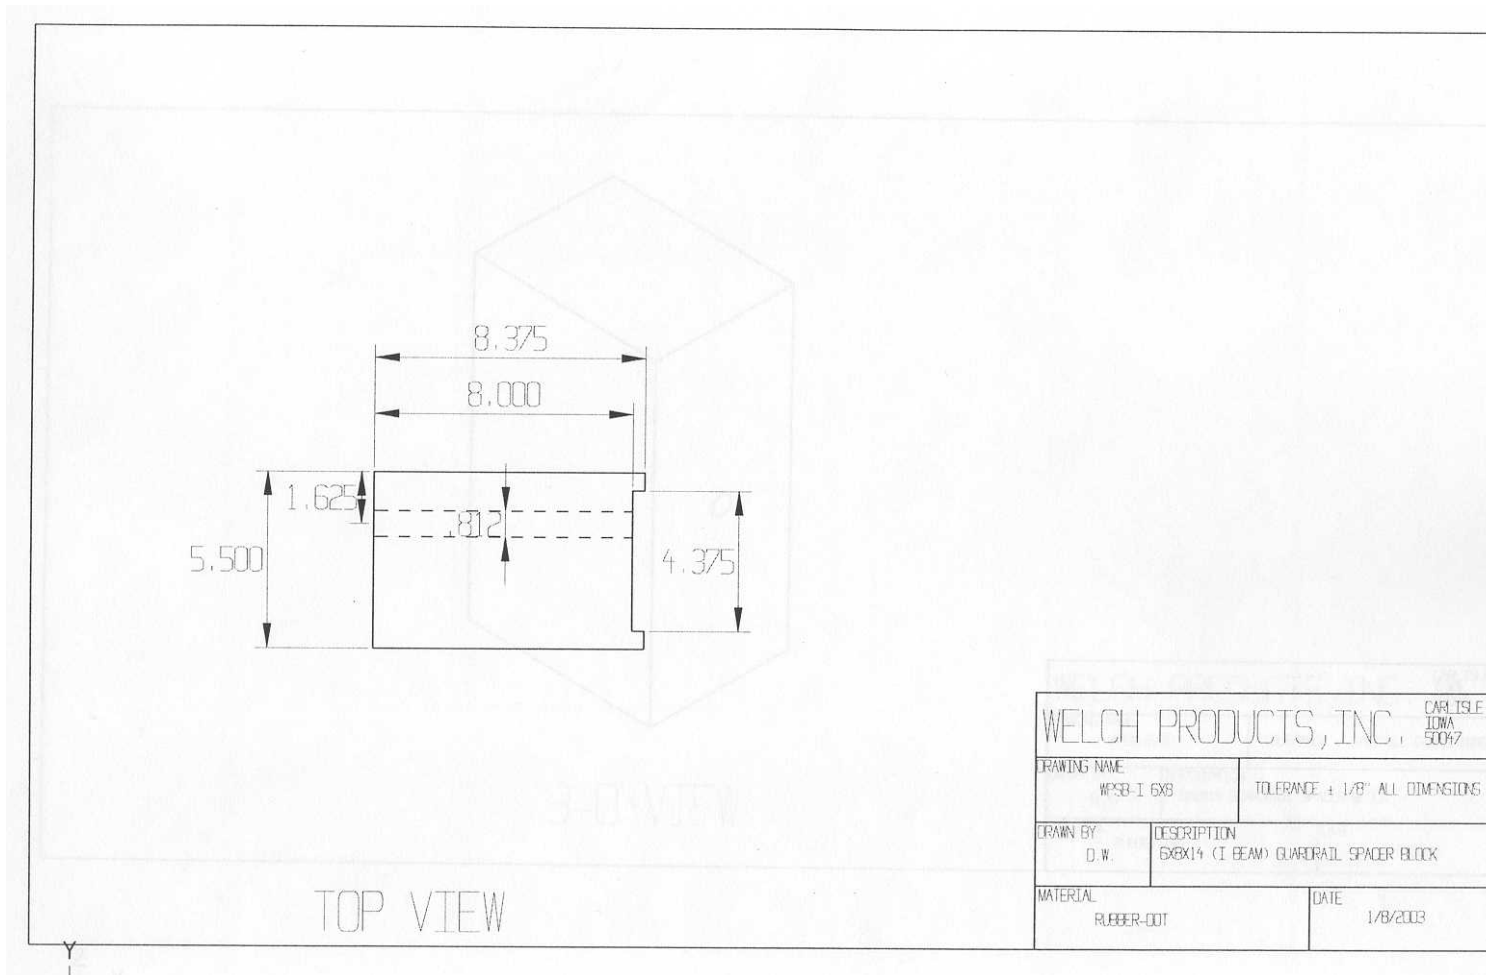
Recycled Rubber Spacer Block Details, Test WB-2
